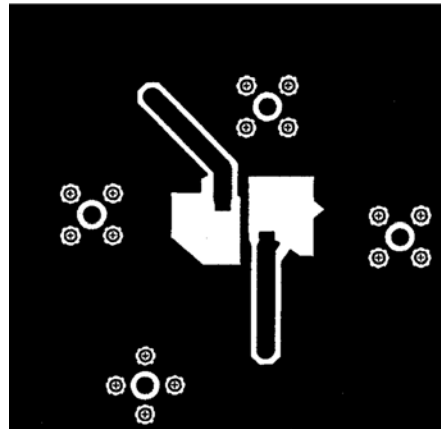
Inverter MSOP Board Layout (Solder Side) (Looking Through the Board)
